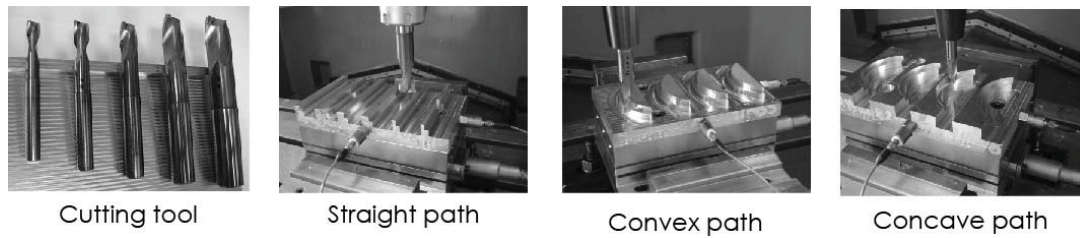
Cutting tools (Sandvik Coromant 8,10,12,14,16 mm) and several geometries (concave, convex, and straight path).
